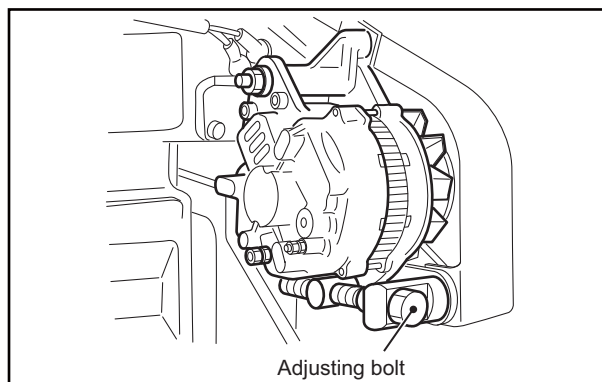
Belt Tension (Alternator Side) - Adjust
